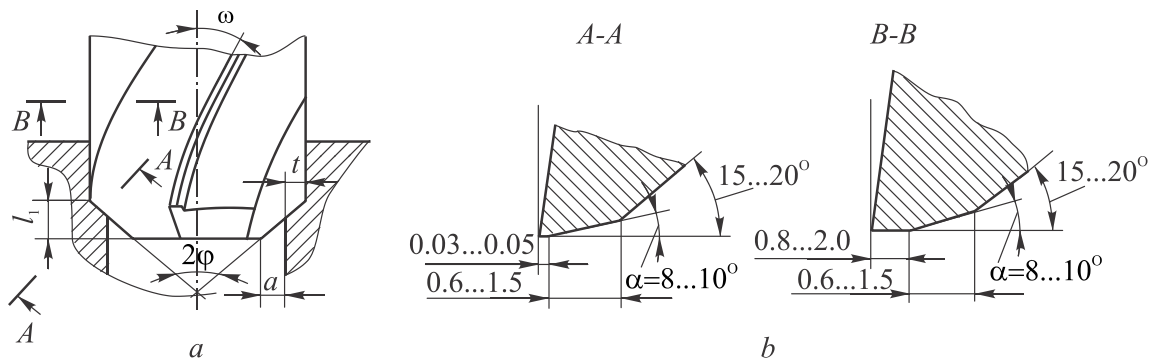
Cutting part of a core drill: (a) elements; (b) types of sharpening
